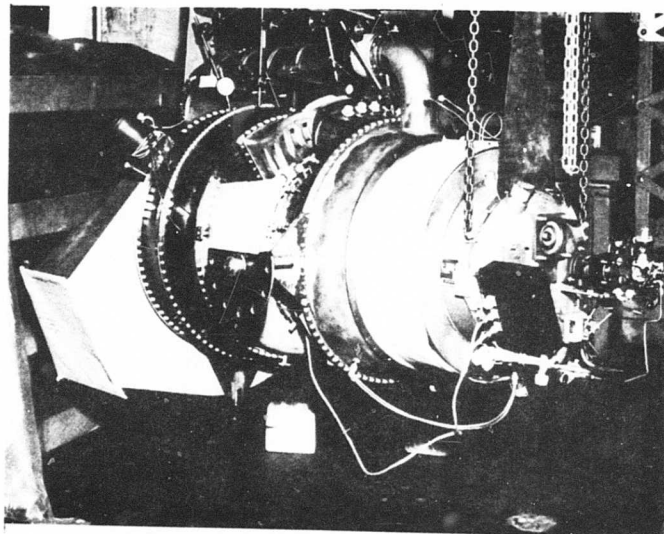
Complete Engine Assembly With Test Exhaust Duct Attached;
